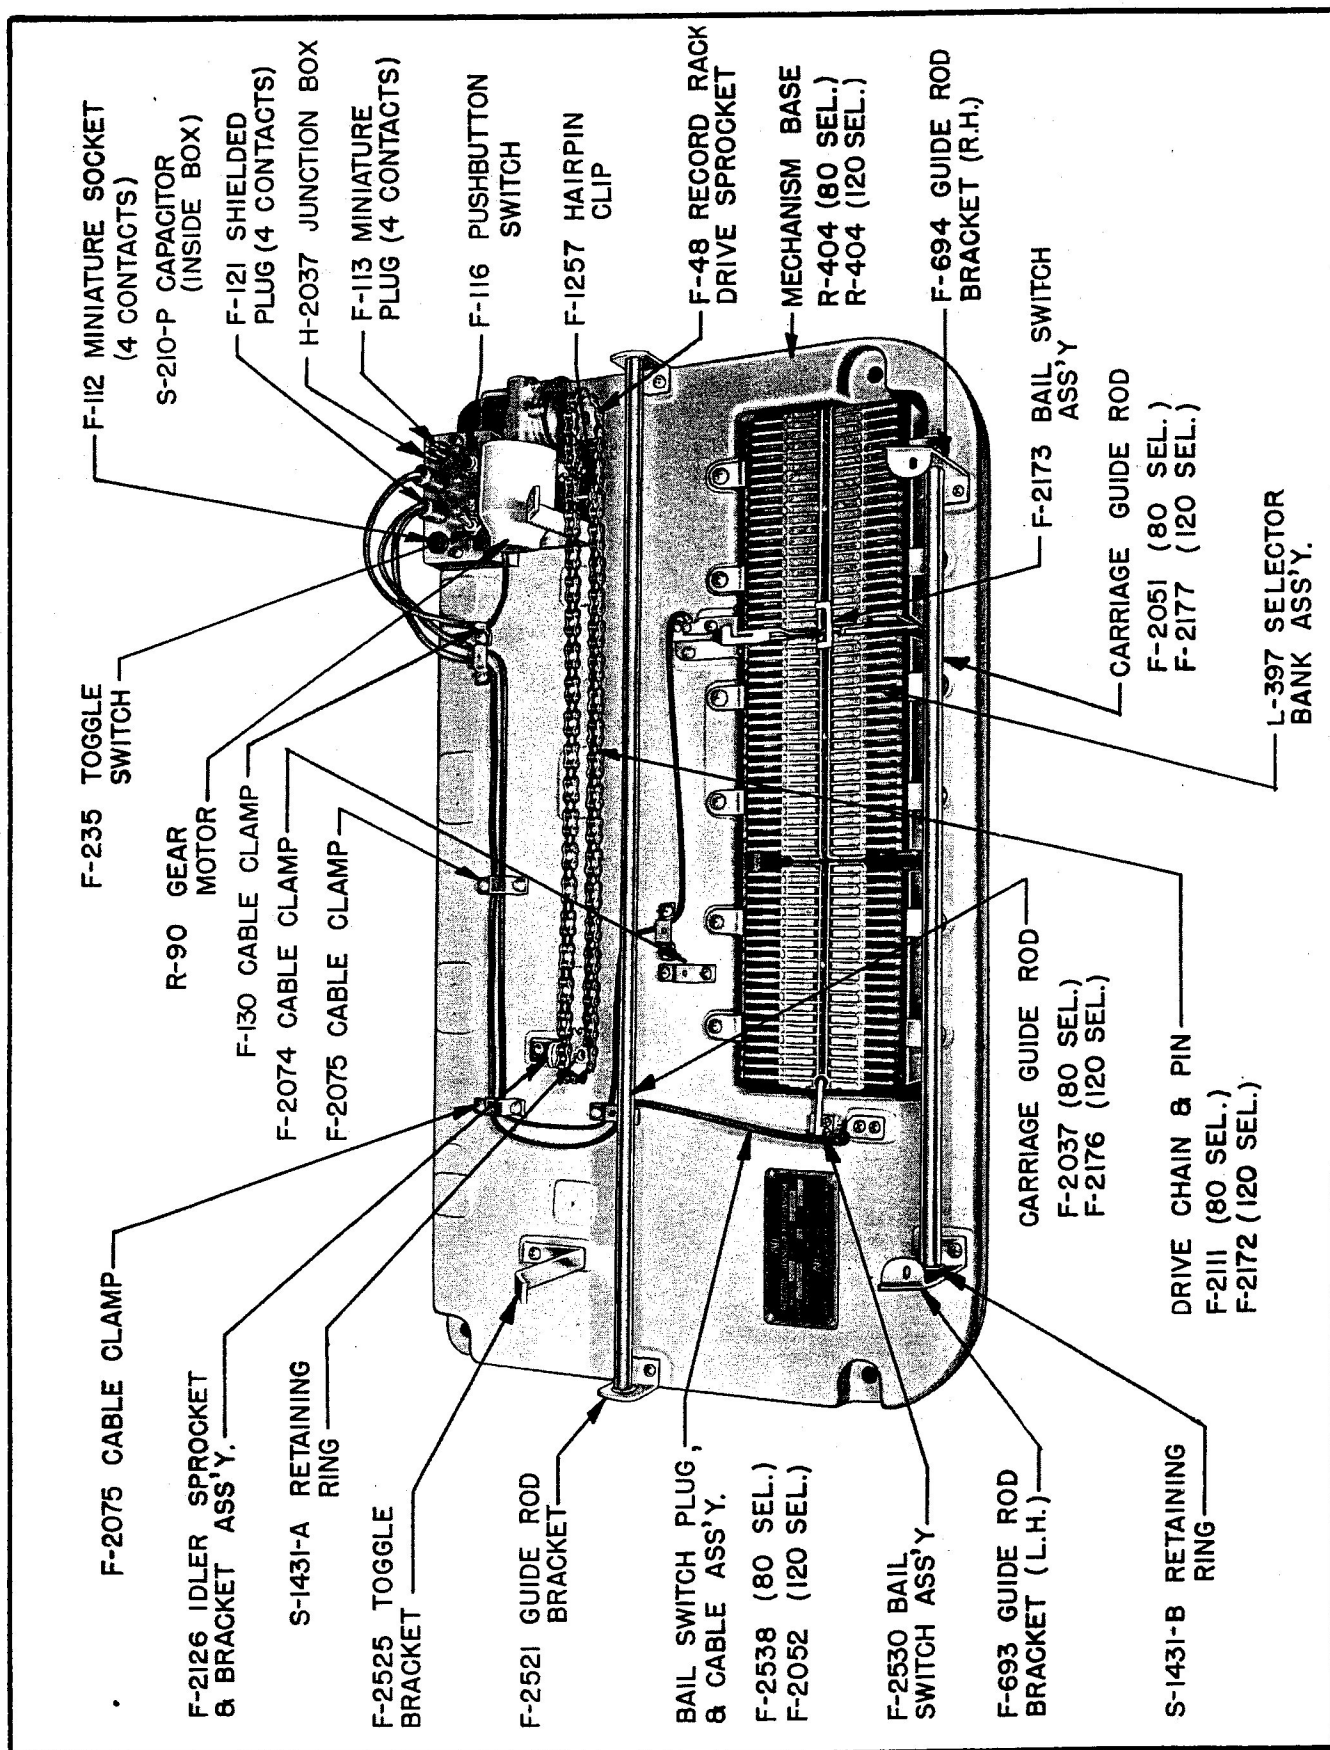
MECHANISM - CARRIAGE AND RECORD RACKS REMOVED
